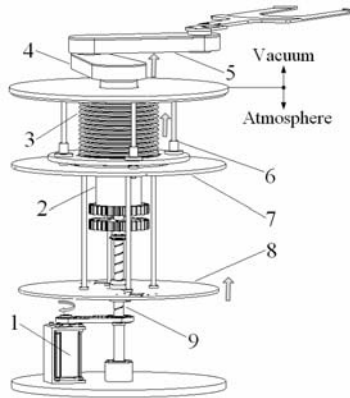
Descriptive diagram for Z movement of wafer-handling robot: 1- AC servomotor of screw; 2- Outer shaft; 3- Bellows seal; 4- Back arm; 5- Forearm; 6- Linear bearing; 7- Immovable platform; 8- Movable platform; 9- Screw
